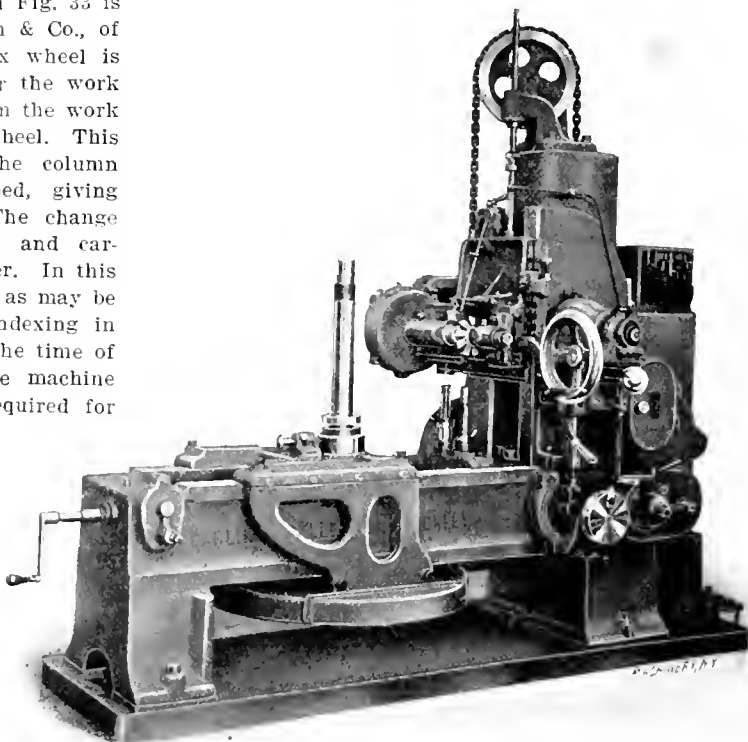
The Darling & Sellers 4-foot Automatic Spur Gear Cutting Machine.
